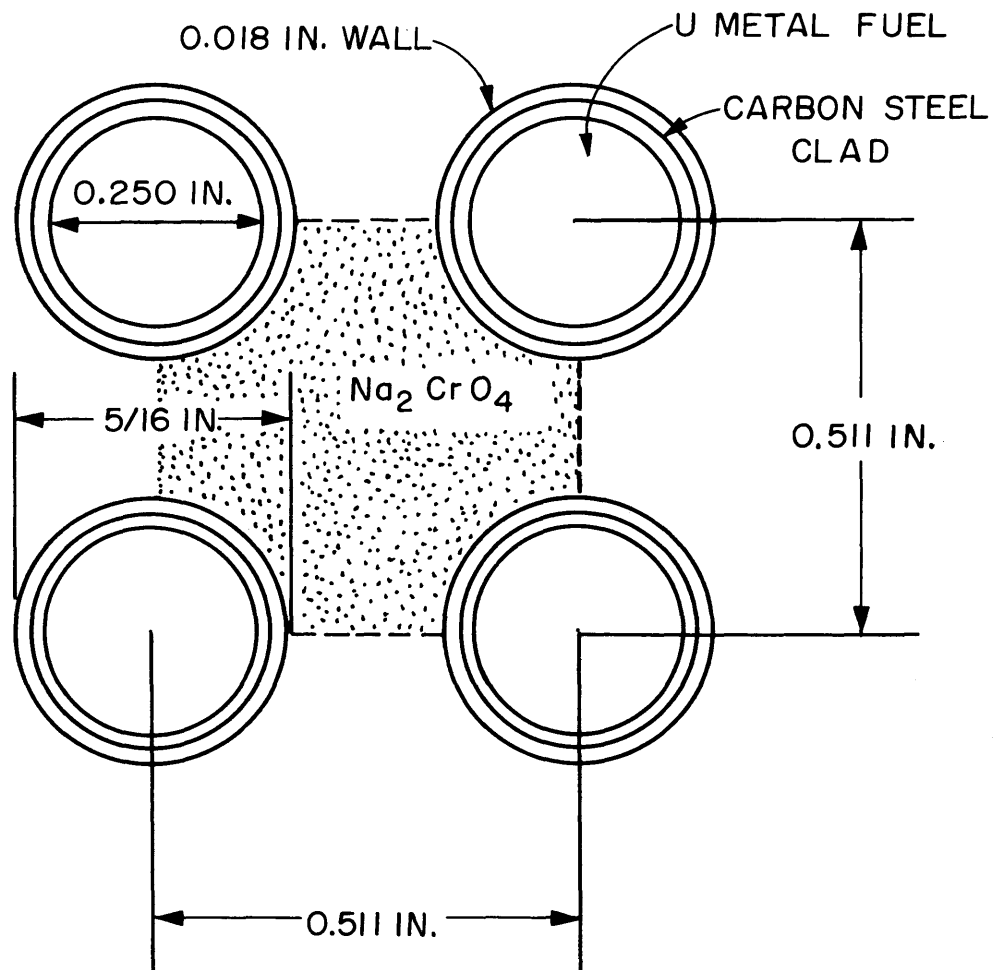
BLANKET NO. 3 UNIT CELL
